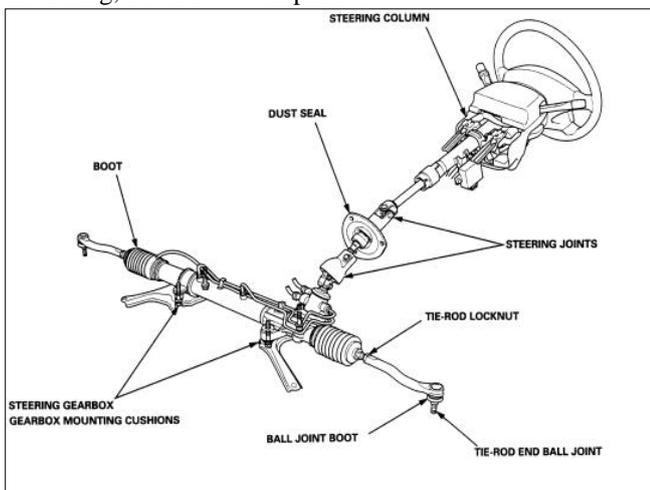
A typical rack-and-pinion steering layout, showing how the rack acts directly on the road-wheel steering arm.
